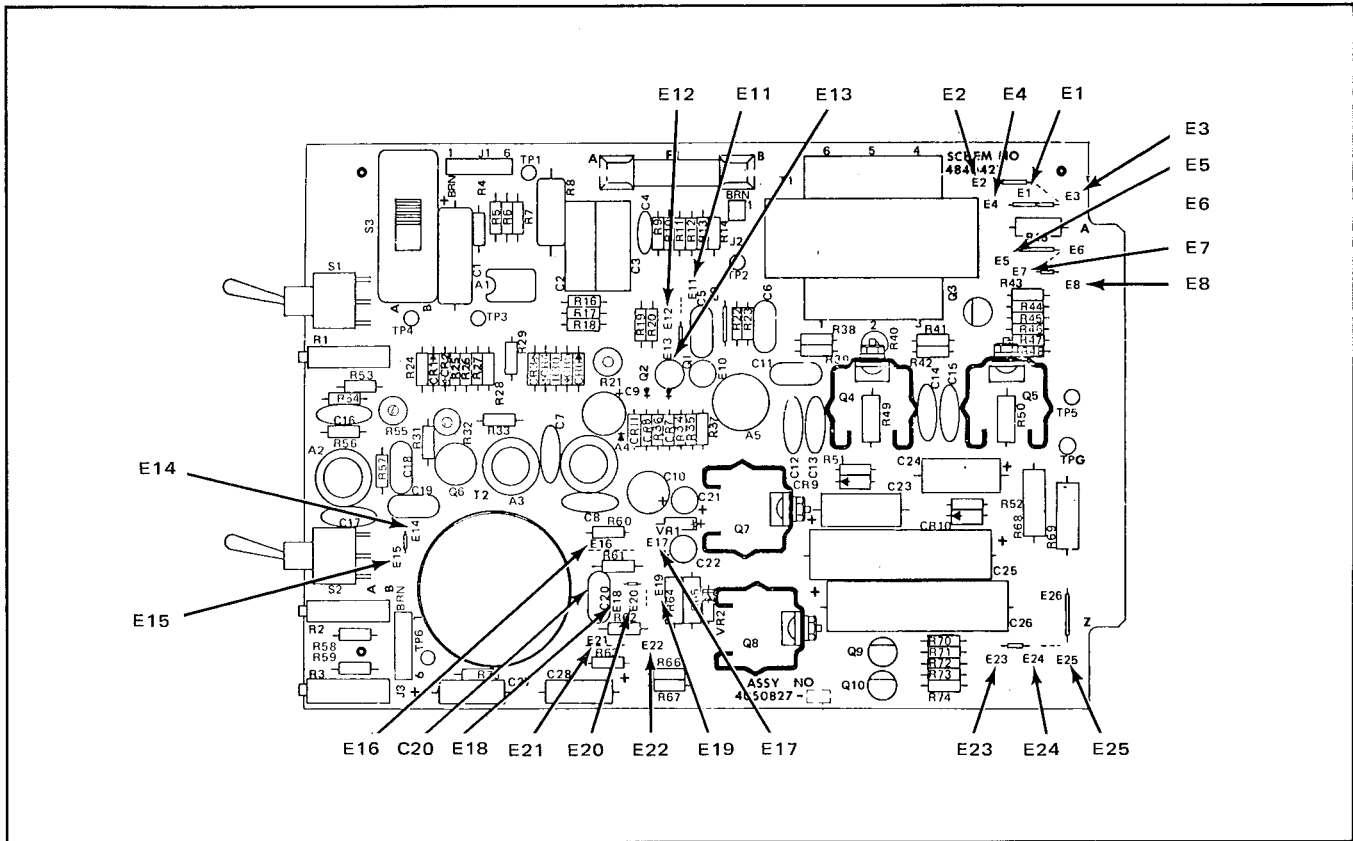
Input/Output Assembly Module – Jumper Terminals and Capacitor C20
